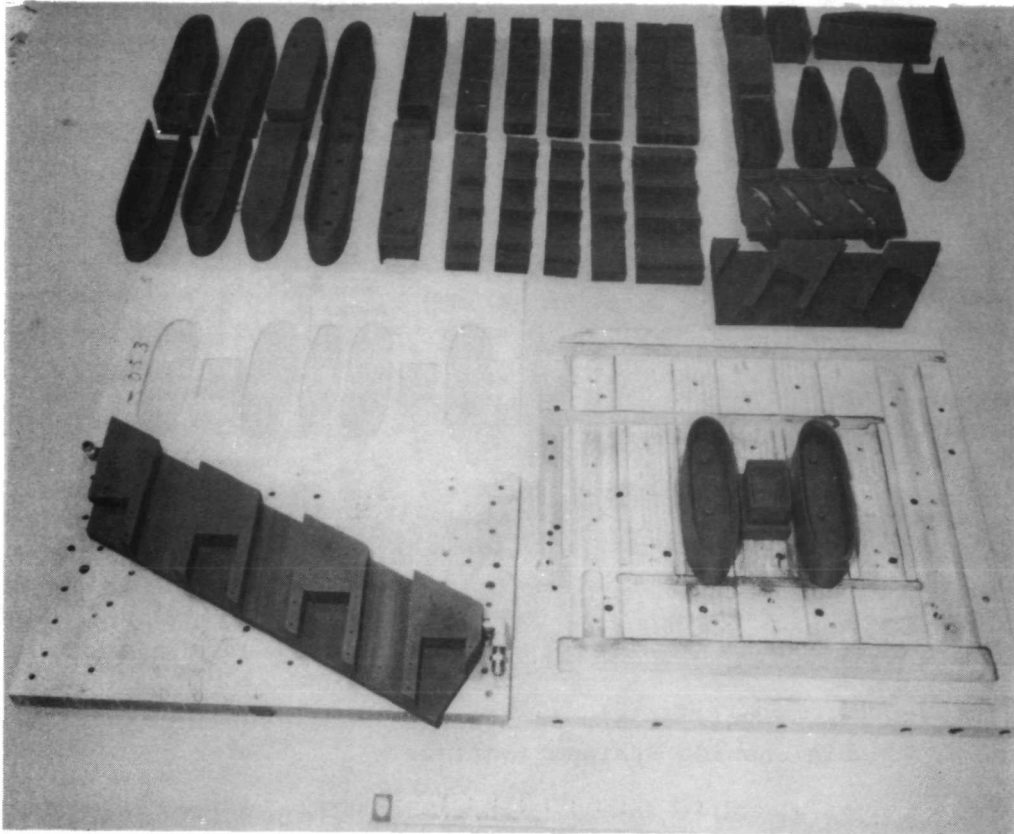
EDM Graphite Electrode Tooling and Tool Mounting Plate Used to Machine Steps on René 41 Doublers
